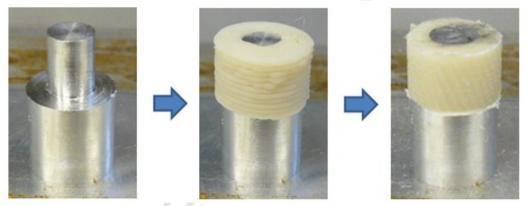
The stepped aluminum (left); the aluminum embedded in polymer before machining (middle) and after machining (right)
